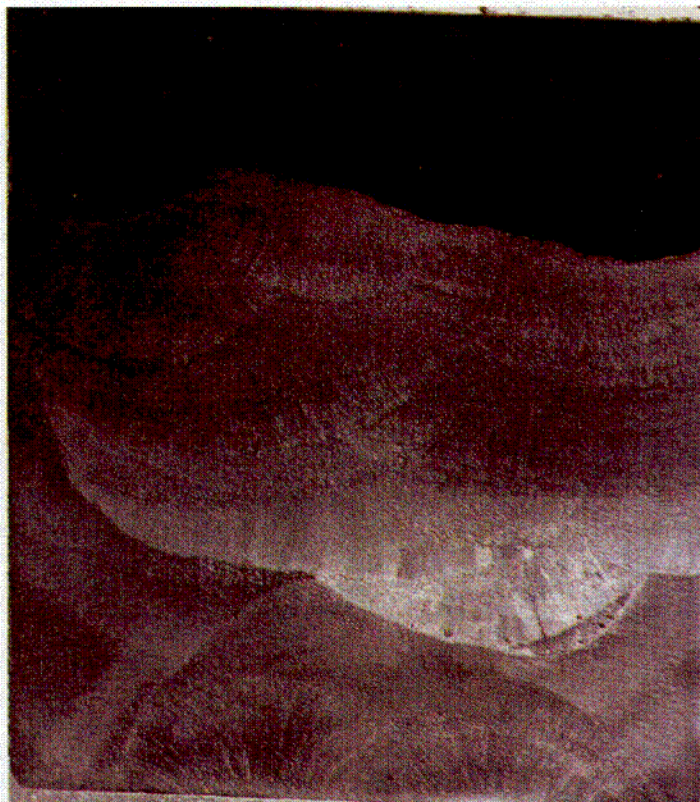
Micrograph of Cube Showing Failed Weld Bead
